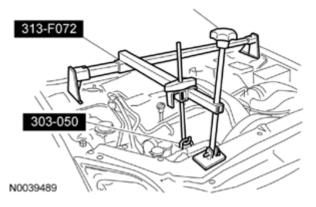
Lifting Engine Using Engine Support Bar And Engine Lifting Brackets Courtesy of FORD MOTOR CO.
